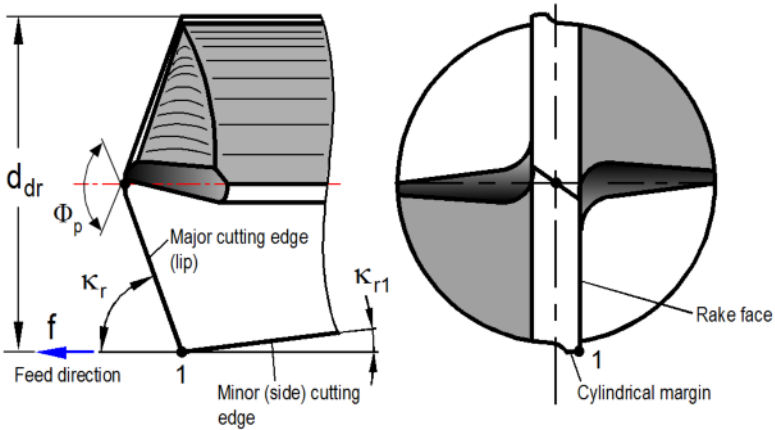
Meaning of the tool minor cutting edge angle  $\kappa_{r1}$  for a straight-flute drill
